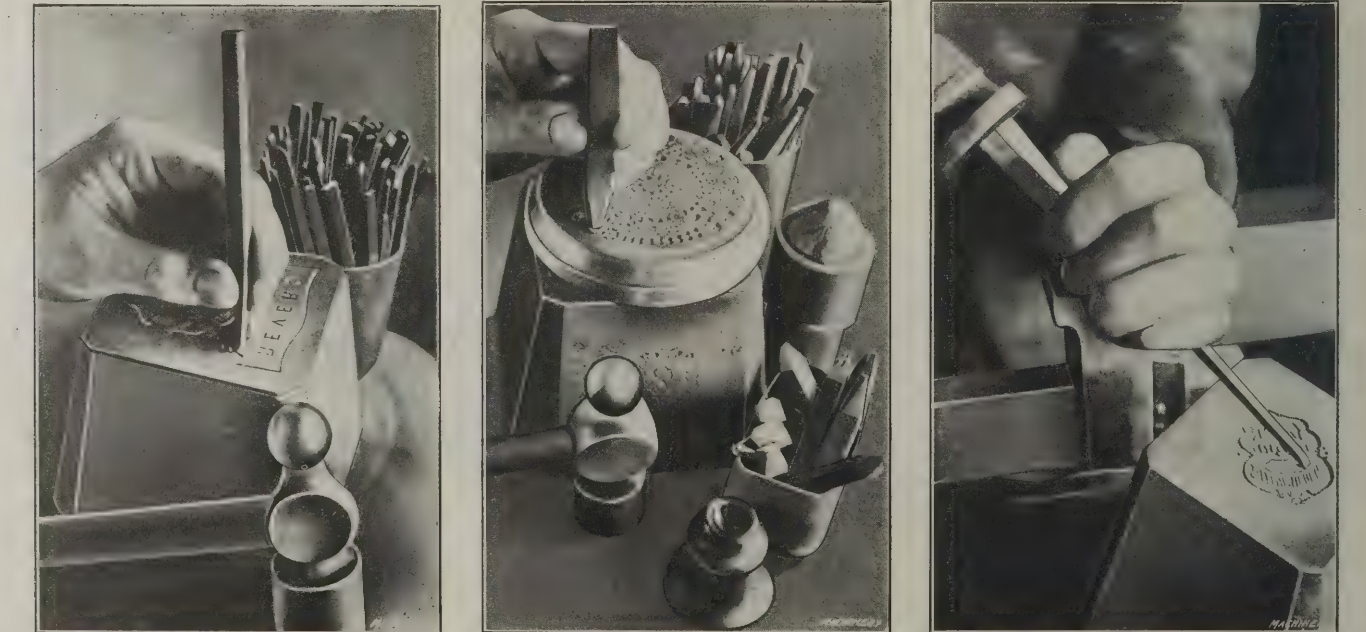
Stamping the Lines of a Design Fig. 13. Making a Punch from a Master Block Fig. 14. Chipping out a Panel in a Name-plate Die
